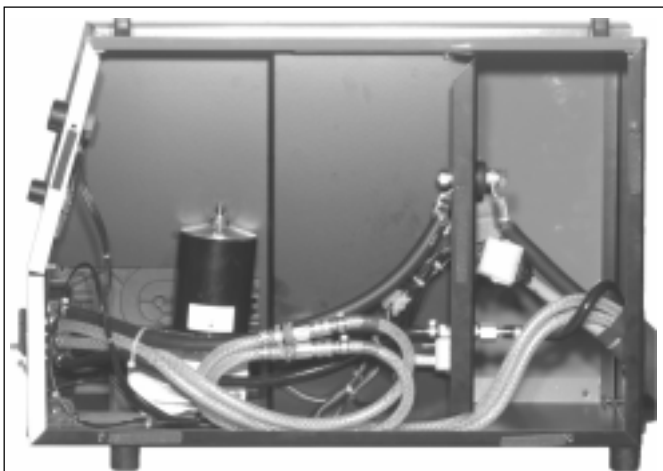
Mounting the interconnecting cable to the VR 57 / Fronius type
